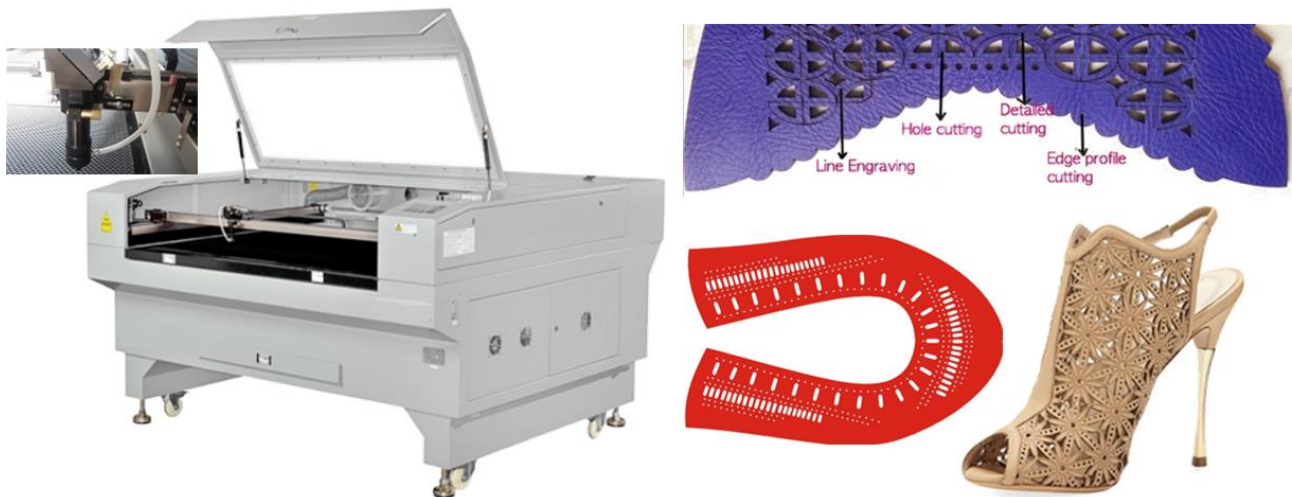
Laser cutting/perforating machine (Indiamart, n.d.3)
